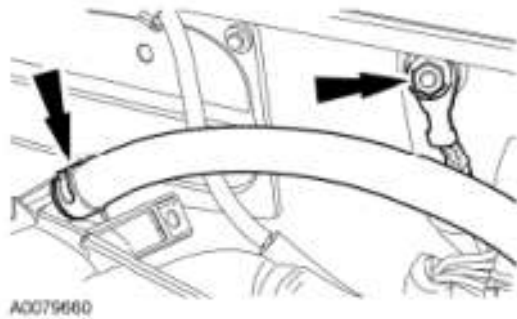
Locating Brake Booster Vacuum Hose And Engine Ground Strap
